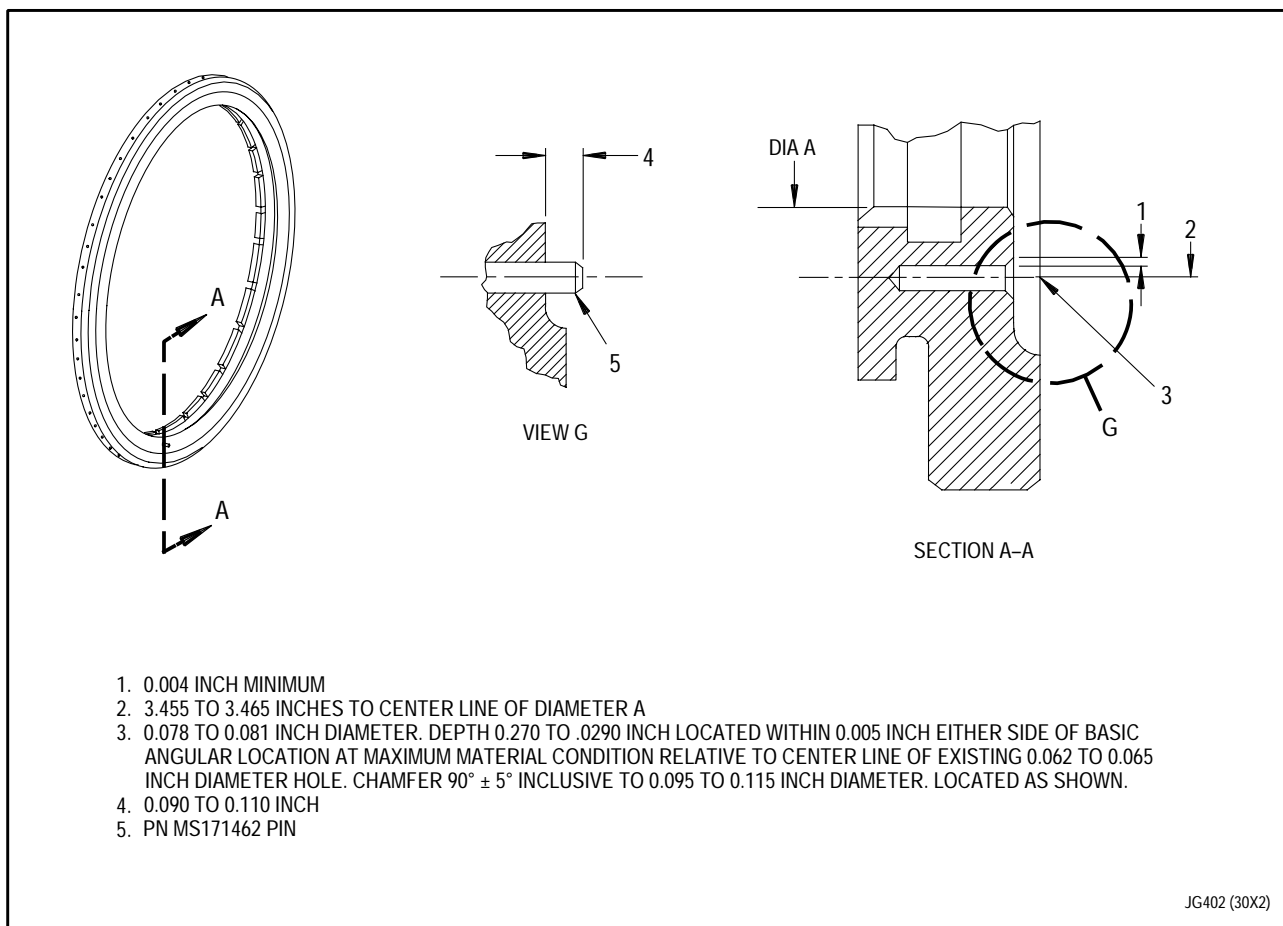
No. 4 Bearing Front Seal Seat Assembly (PN 4032669) - Spring Pin Hole Repair
